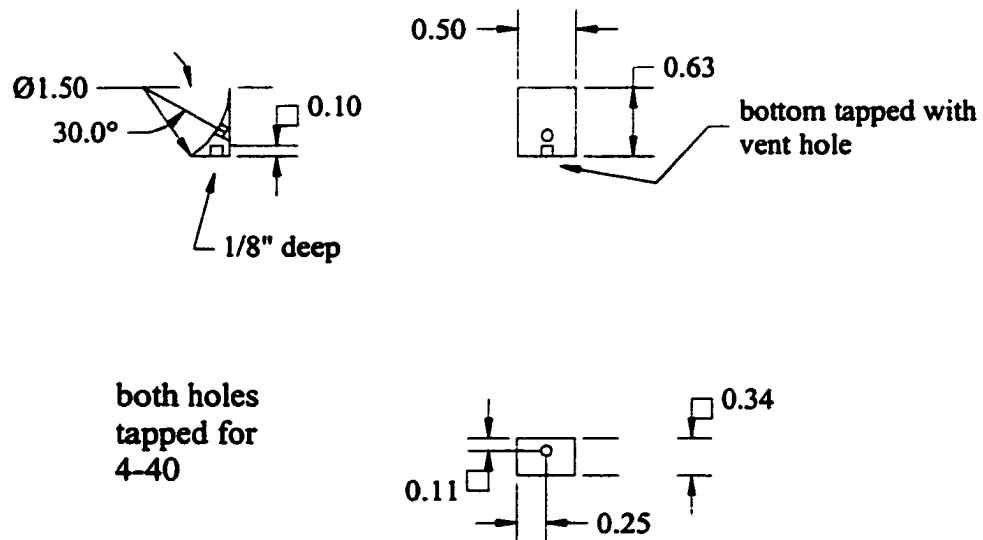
Design drawing for the support tube/Ti plate angle brackets.
